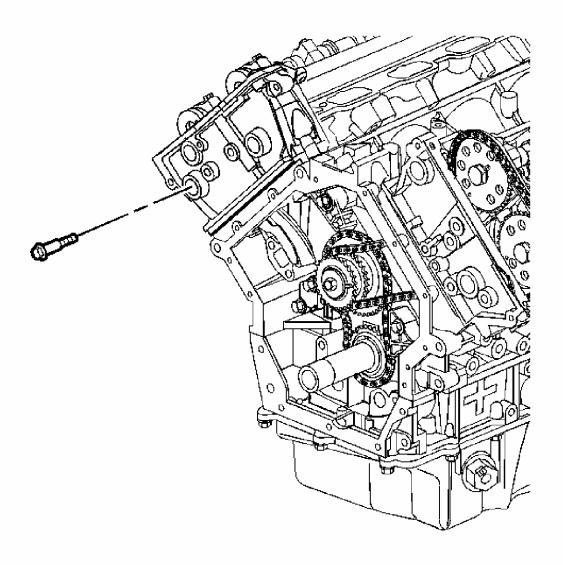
Identifying Right Secondary Camshaft Drive Chain Shoe Bolt Courtesy of GENERAL MOTORS CORP.
